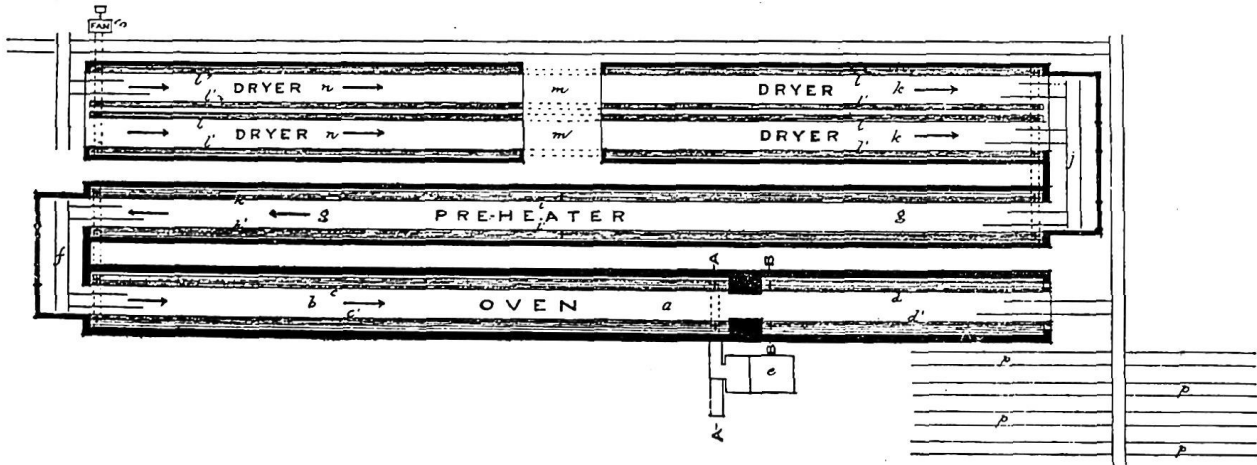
Plan of Dressler's tunnel kiln with pre-heater.
